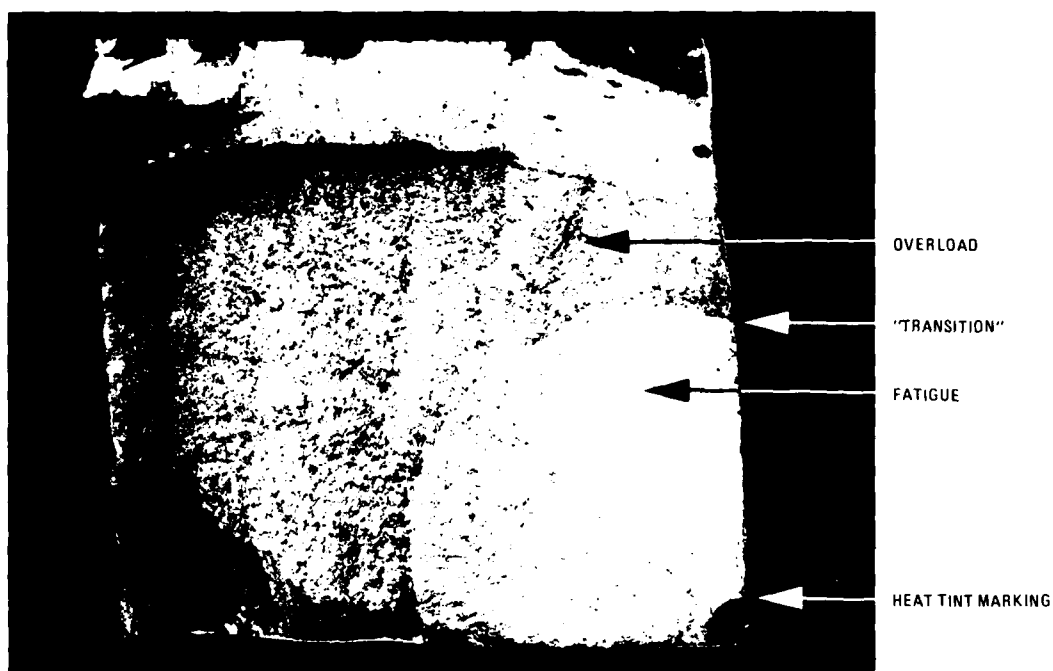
Markings on fracture surface of corner crack specimen (x 9)
